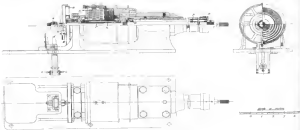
PROPELLER DYNAMOMETER—SECTION
